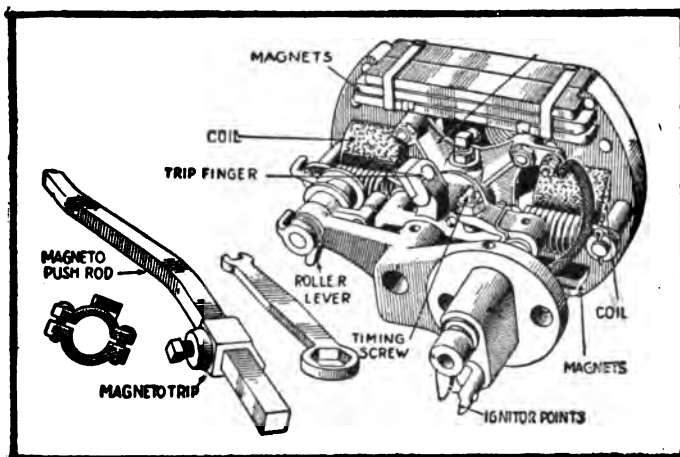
Oscillating armature low-tension magneto and integral igniter plate a complete ignition system.
